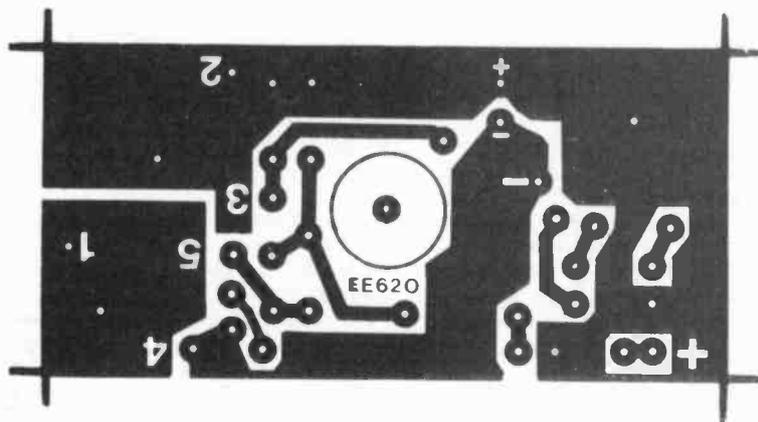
Full size copper foil master pattern for the EPROM Eraser p.c.b.
